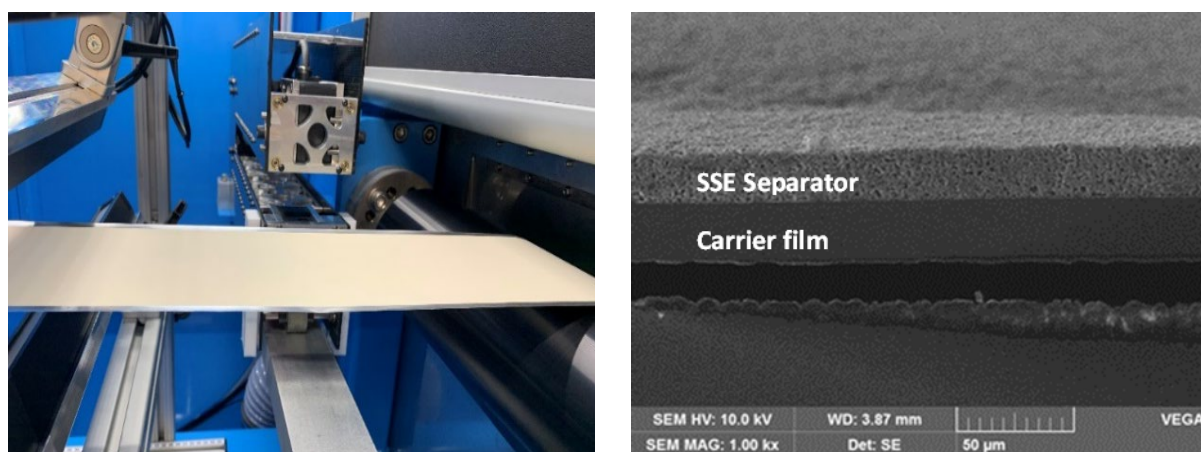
A solid-state-electrolyte separator coating by a roll-to-roll process
